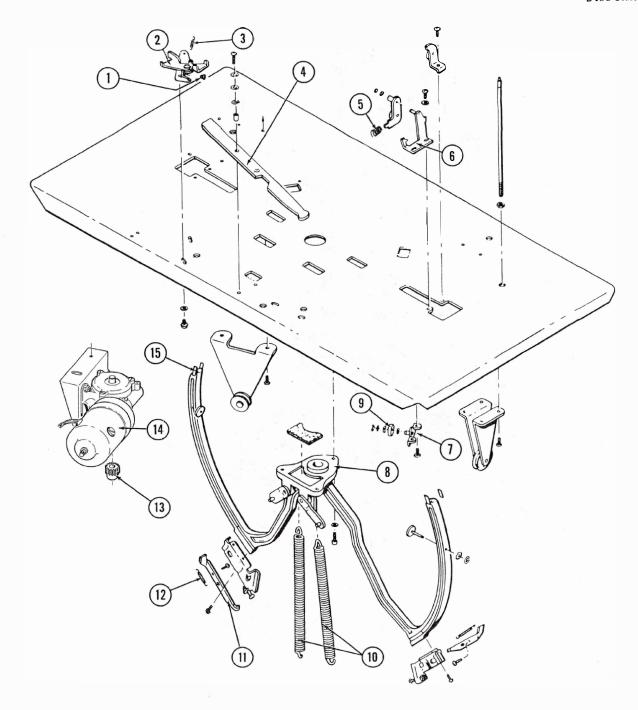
CHASSIS MOUNTING PLATE, PIVOT CASTING AND ARM ASSEMBLY, 2404 - 2404S, 2410 - 2410S
